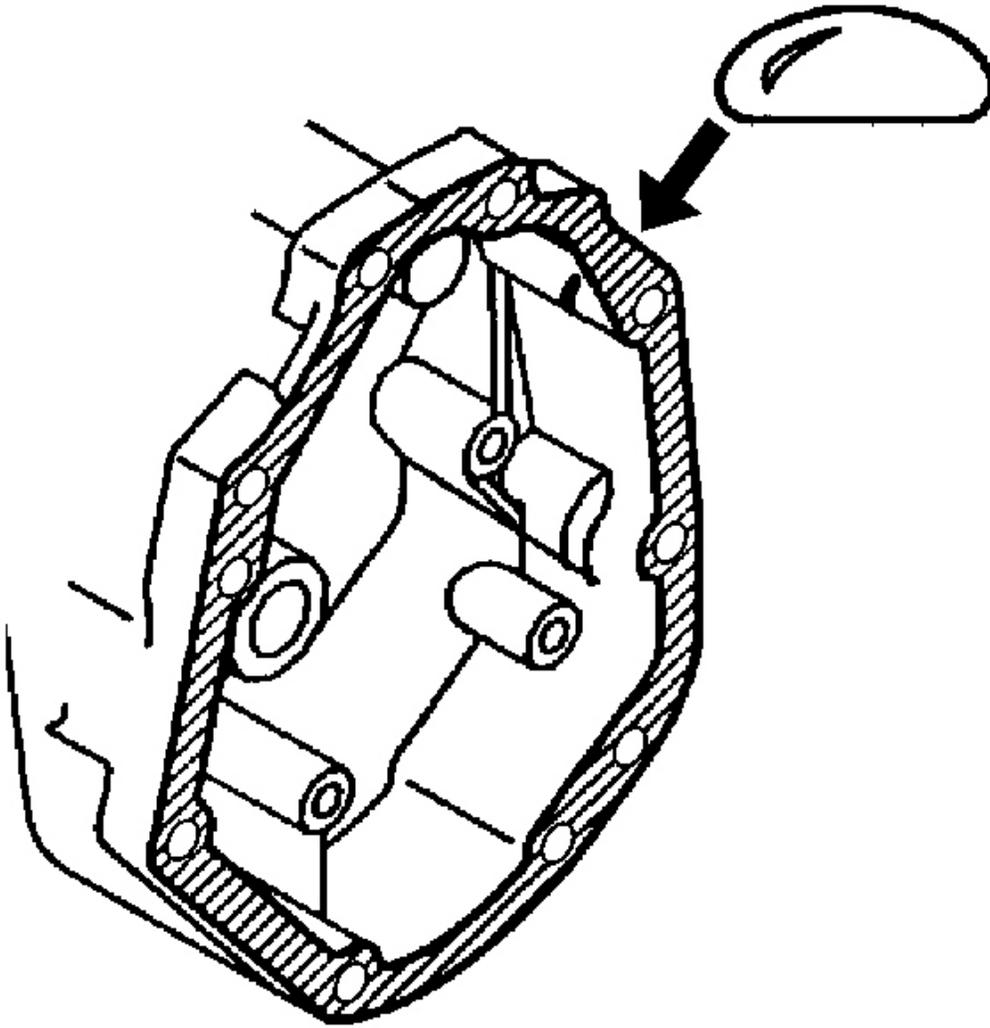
Applying Sealant To Extension Housing To Transmission Case Mating Surface
